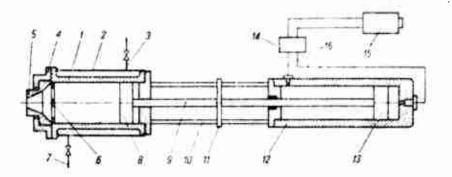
Diagram of a piston extruding press: 1 = cylinder, 2 = heating jacket arrangement, 3 = heating medium inlet, 4 = head housing, 5 = holding head, 6 = grid, 7 = heating medium outlet, 8 = piston, 9 = piston rod, 10 = guide bar, 11 = yoke, 12 = hydraulic cylinder, 13 = piston, 14 = manipulator, 15 = pump, 16 = oil pipes.
